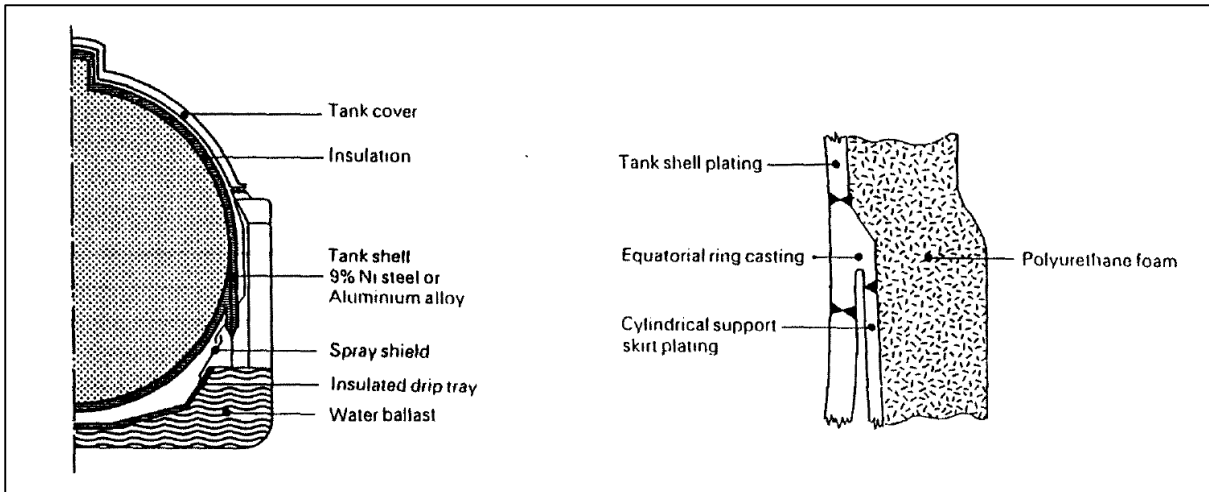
Details of tank construction on Moss containment tanks (Zuidgeest, 2002)
